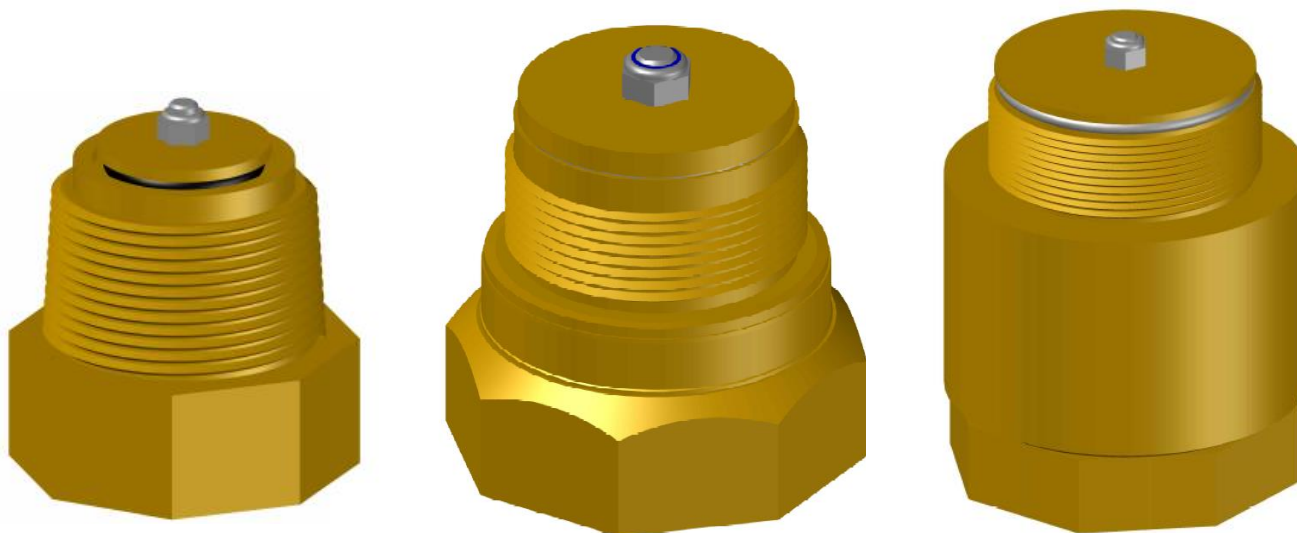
1 inch, 2 inch & 3 inch Check Valve
